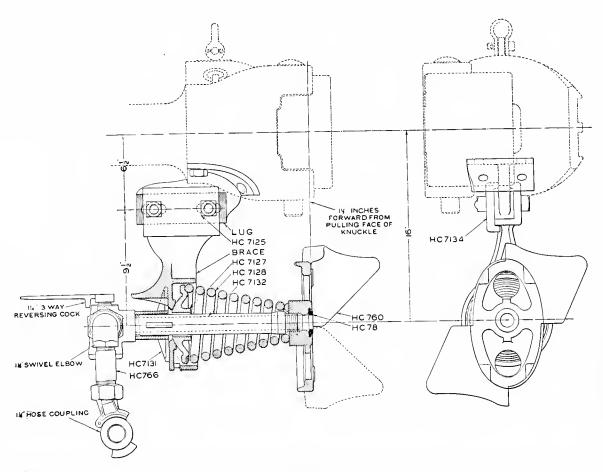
Freight Connector for Air Brake, Signal and Steam Heat Pipes. New York Air Brake Company.
